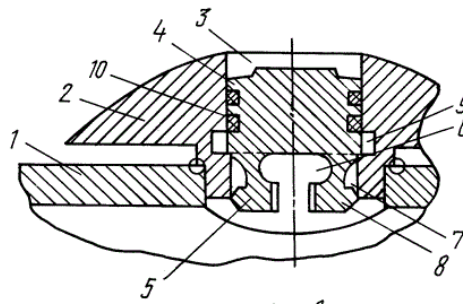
Hydraulic centralizer: 1 - the casing; 2 - the housing; 3 - a cylindrical channel; 4 - the centering body; 5 - the segmental elements; 6 - the oval cavity; 7 - the ring-shaped notch; 8 - the conical protrusion; 9 - the ring groove; 10 - the fixing elements
